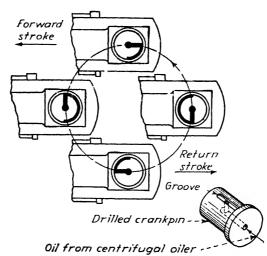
Oil spreads over the bearing before load is applied. (Courtesy of Socony-Vacuum Oil Co.)
